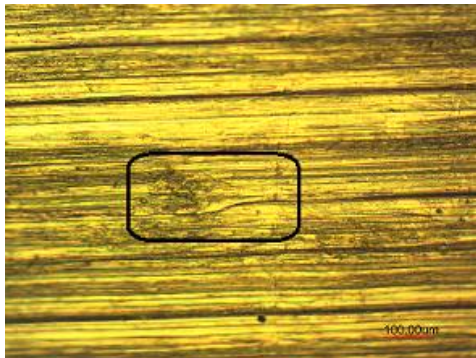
Optical microscope image of the workpiece surface after machining process by non-texture tool
